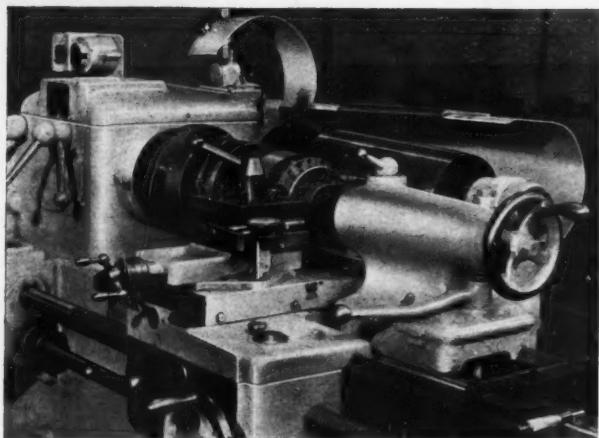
Machining the work-spindle for a No. 6 Verticalauto on an H.E.B. OP 420 copying lathe, which is extensively used for shaft work. The forging, in En. 15 steel, is rough turned all over, leaving 0.010 to 0.012 in. of metal (on diameter) for removal during subsequent grinding. All shoulder lengths are maintained within 0.002 in., the tool being controlled by a circular master at the rear of the lathe. A Firth Brown TE+ tipped tool is used, and is fed at a rate of 0.014 in. per rev., the work being run at 250 r.p.m. The work is driven by pegs, in an adapter plate, which engage the chuck fixing holes in the flange
